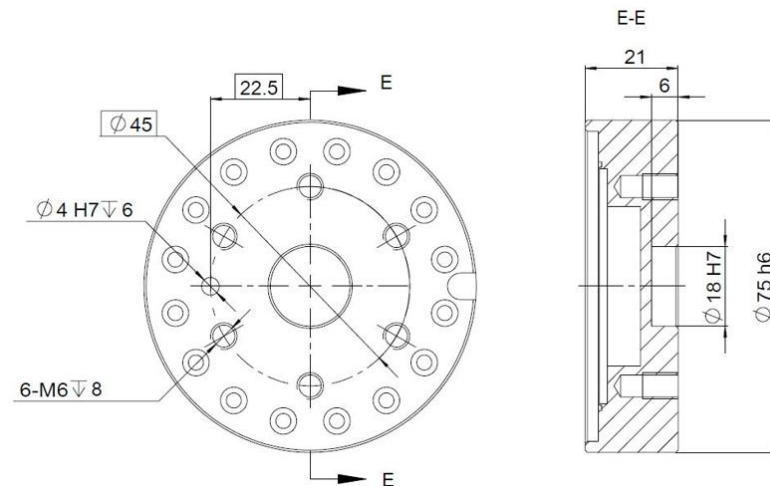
Schematic diagram of flange dimensions for the wrist of the RX3-A635-2700/RX3-A620-3100 operating console
